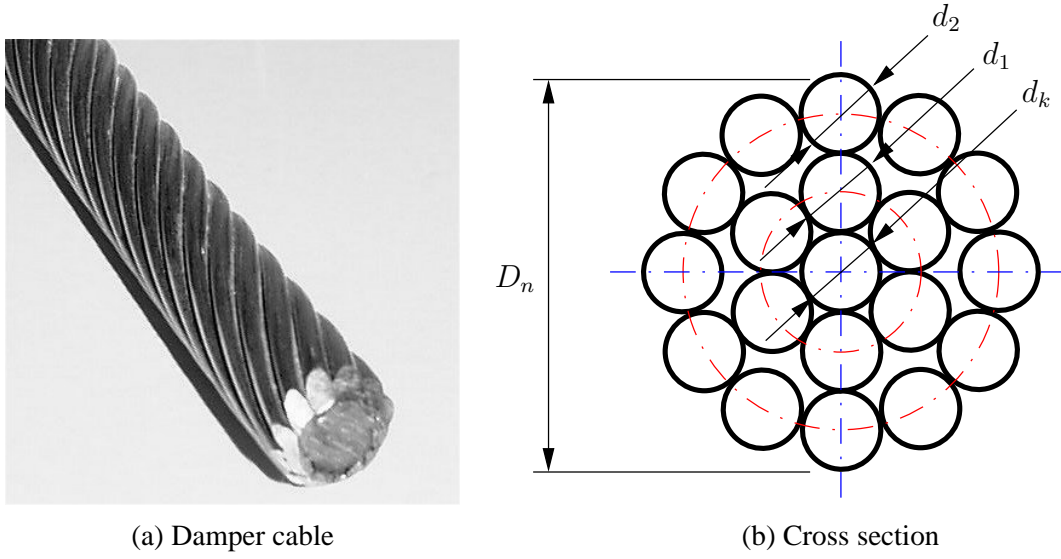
Damper cable of a STOCKBRIDGE damper
